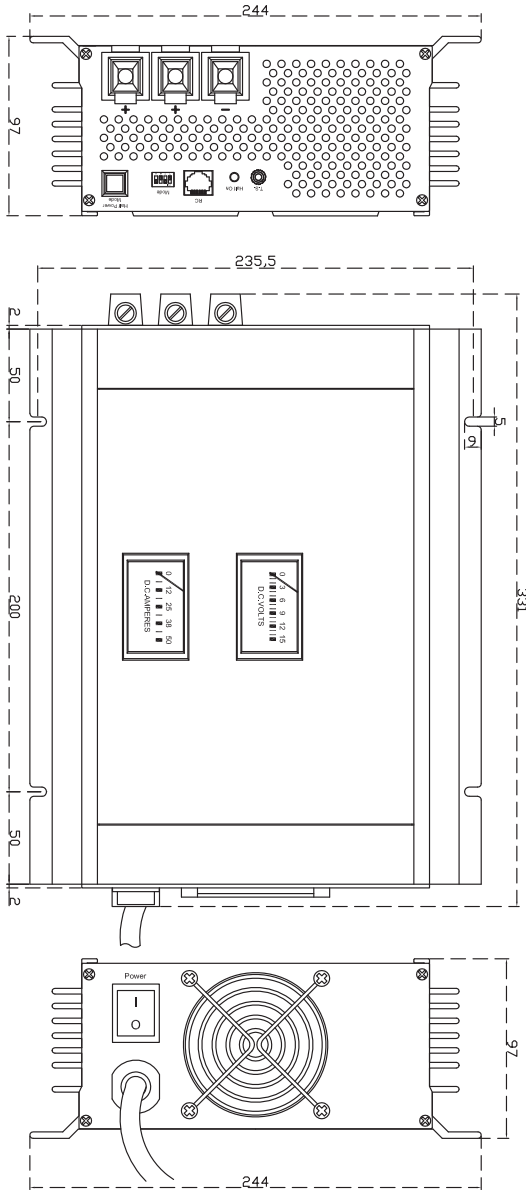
Dimensional Drawing of SEC-1250UL & SEC-2425UL
